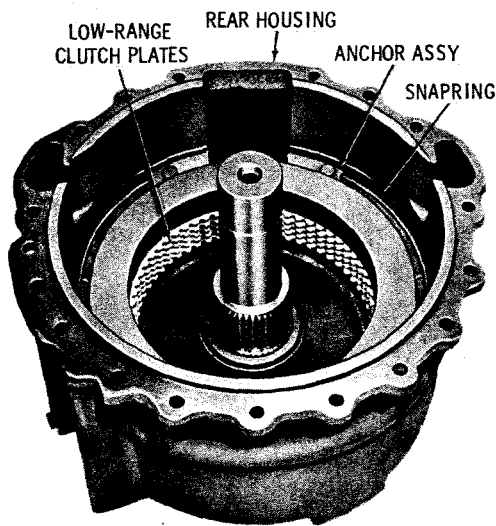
Removing rear housing (TRT 2221-3, 2421-3 with underdrive)
